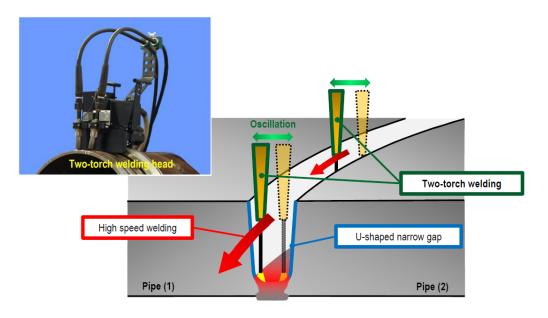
Welding head (photo) and features of the offshore pipeline welding
